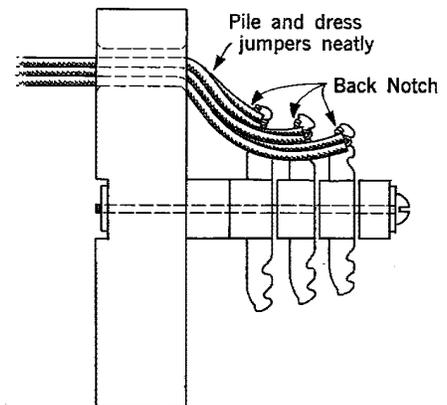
Permanently Bridged Cross Connections on No. 183C or Similar Type Terminal Strips with Twin Notch Terminals
